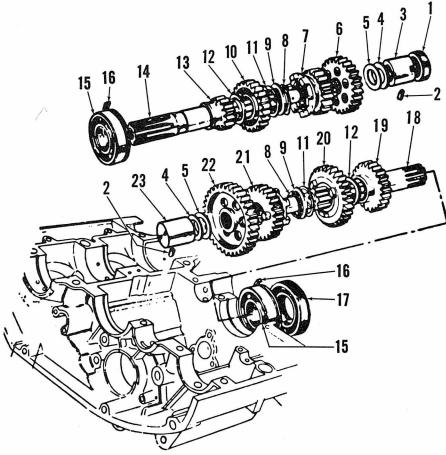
Exploded view of S32-2 transmission assembly. T10 transmission is similar.
